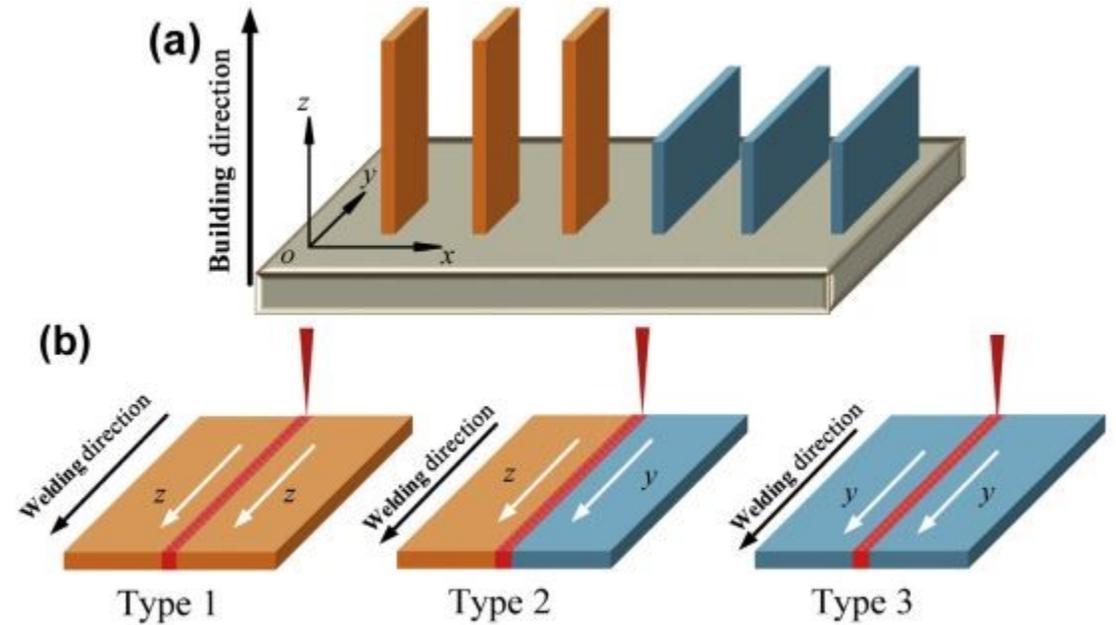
Schematic drawings of SLMed plates (a) and different laser welding types (b).
